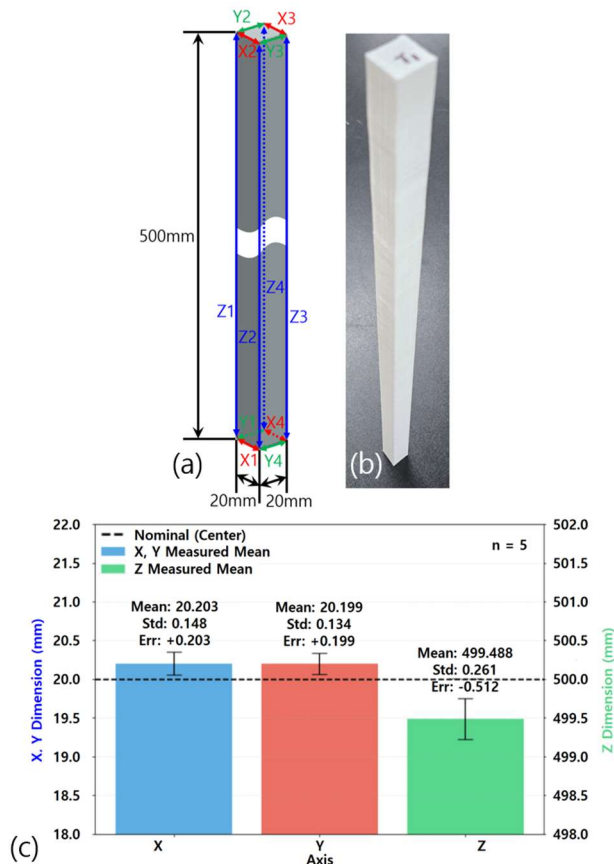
Dimensional accuracy evaluation of the 500 mm beam specimen: (a) specimen geometry and measurement positions; (b) printed specimen; (c) dimensional error results
